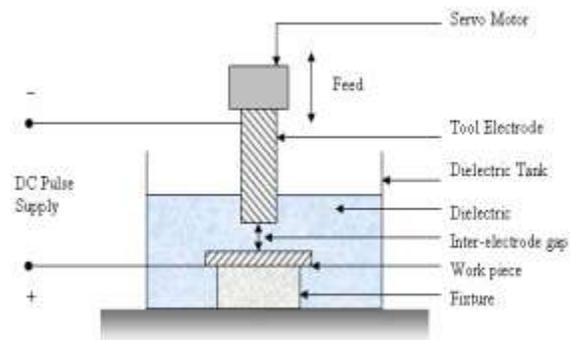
Schematic of an Electric Discharge Machining (EDM) machine tool
